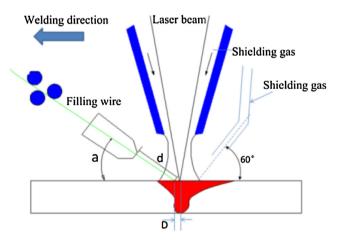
Schematic diagram of laser welding with filler wire process.
